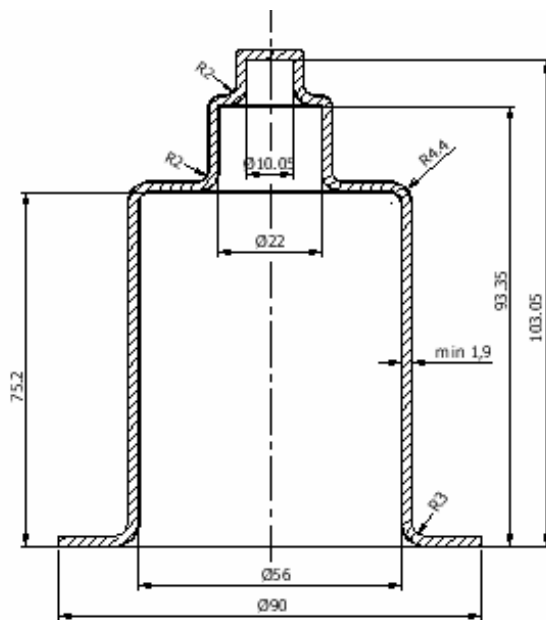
The component to be produced by multi-step deep drawing on a transfer press
